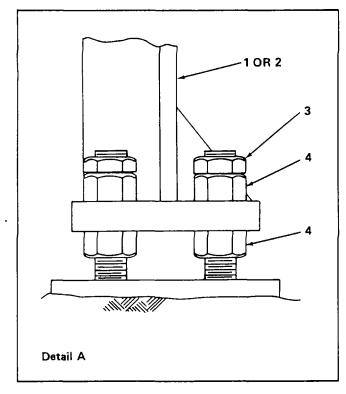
Tower Assembly (Sheet 1 of 5)
